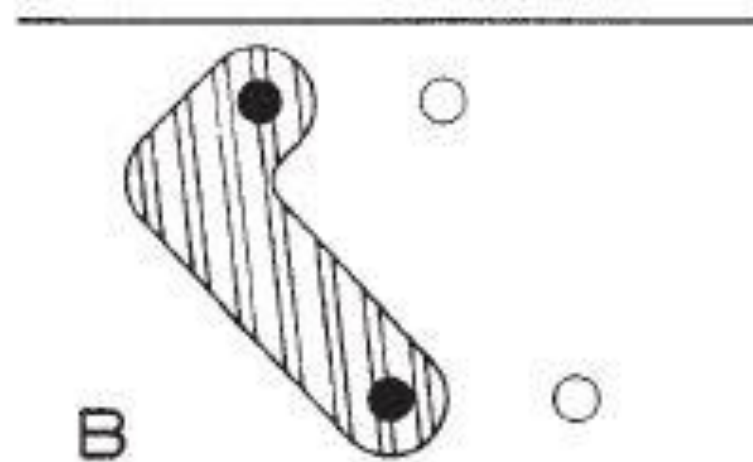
Use of the layout for making the piercing and blanking punch layout.
